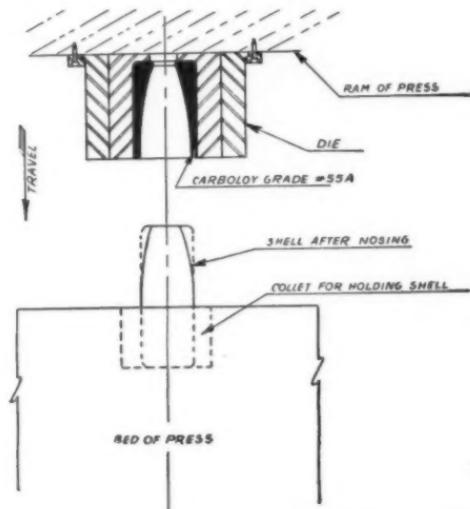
The Carboloy dies used for cold nosing artillery shells up to 105 mm. in size produced from 1,000,000 to 3,000,000 shells per die, as contrasted with 50,000 shells per steel die. The carbide dies did not tend to wear and gall as the steel dies did. No change in cold nosing practice was required when making the change-over from steel to Carboloy.
